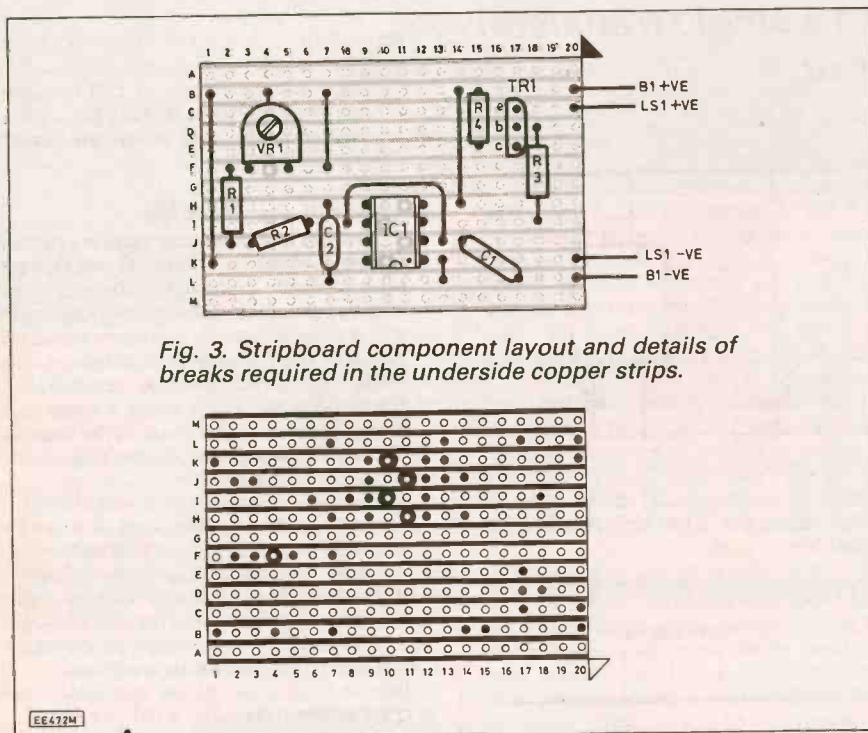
Stripboard component layout and details of breaks required in the underside copper strips.
